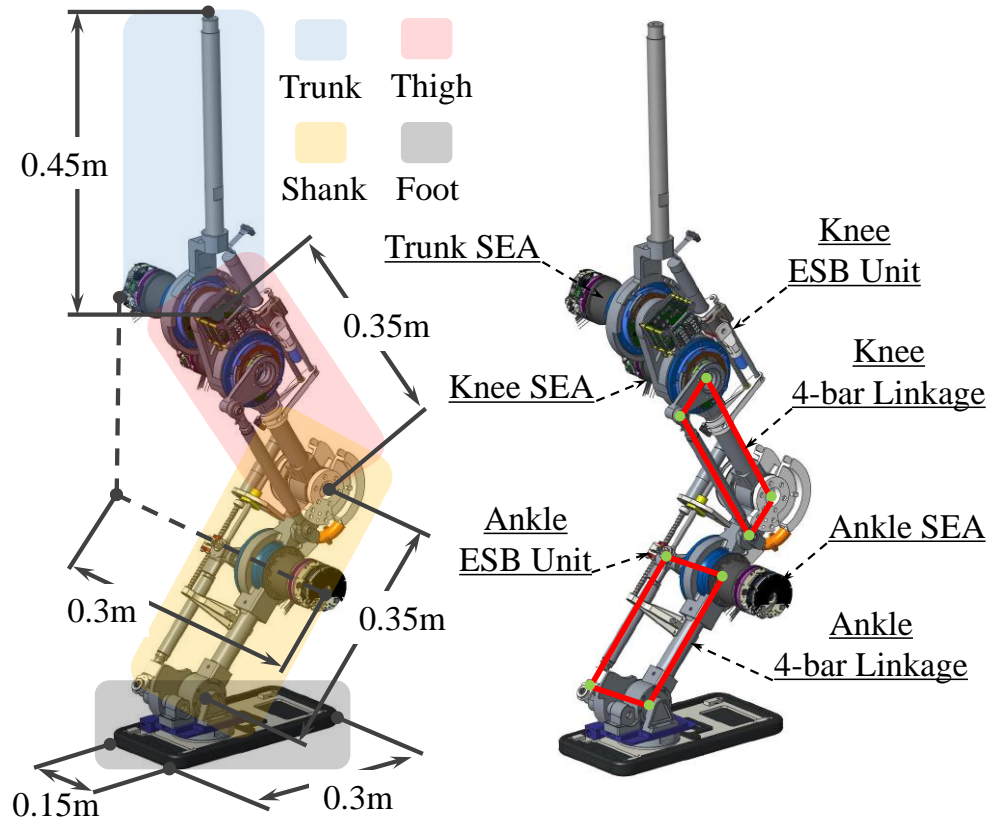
The eLeg prototype in monoarticulated configuration, showing overall dimensions and major components.
